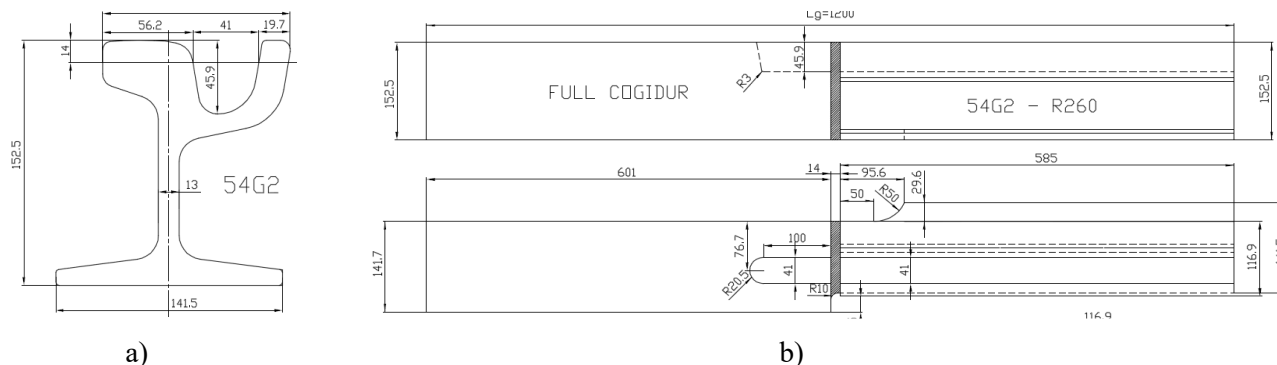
Cross section of tram rail 54G2 (a); preparation of the joint of the rail and the welding block (b)
